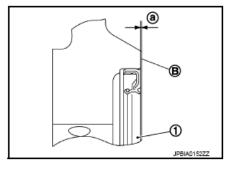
Identifying Rear Oil Seal Installation Position Courtesy of NISSAN NORTH AMERICA, INC.
